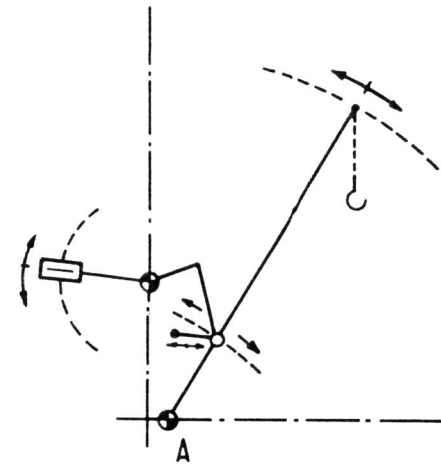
Sketch of the travelling crane showing the position of the bearing A in which screws fracture occurred.
